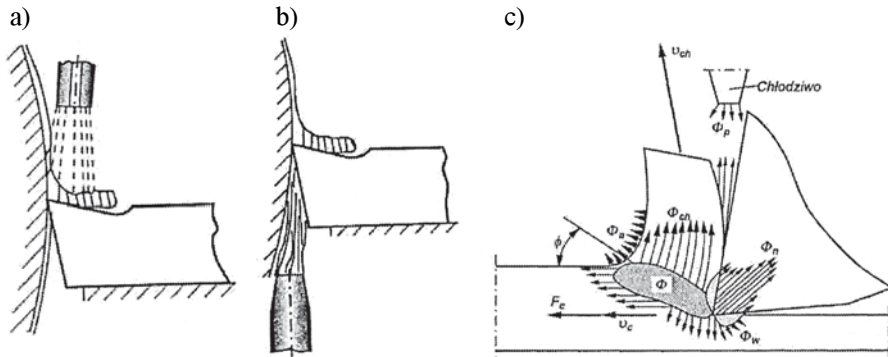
Typical implementation of cutting-tool lubricant into the cutting zone: a) cutting fluid pointed at a chip which goes down the surface of working tool, b) on touching surface of a workpiece, c) on the surface of advance between a chip and this surface
